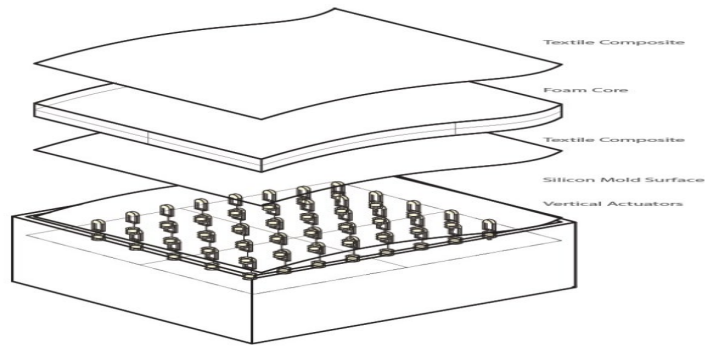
Prototype Mold assembly with Silicon flexible membrane attachment with vertical actuators (Ku).
